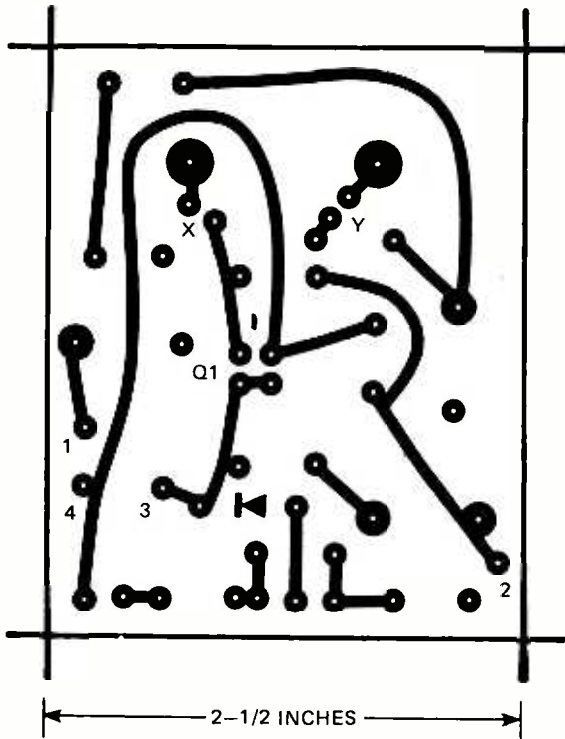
PRINTED-CIRCUIT TEMPLATE FOR FLASHMETER is simple to copy. If you prefer to lay out your own—do so, since the circuit is not critical to parts placement.
